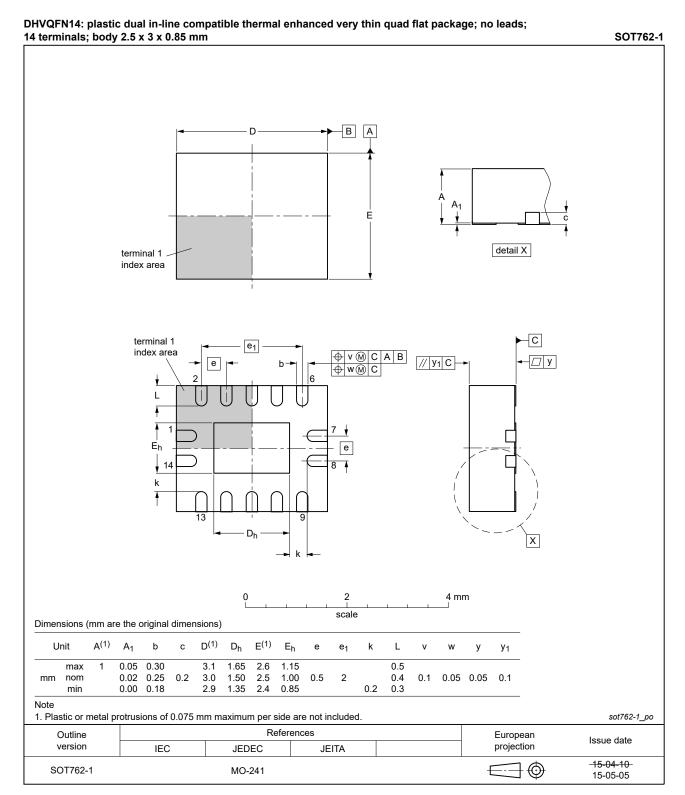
Package outline SOT762-1 (DHVQFN14)
